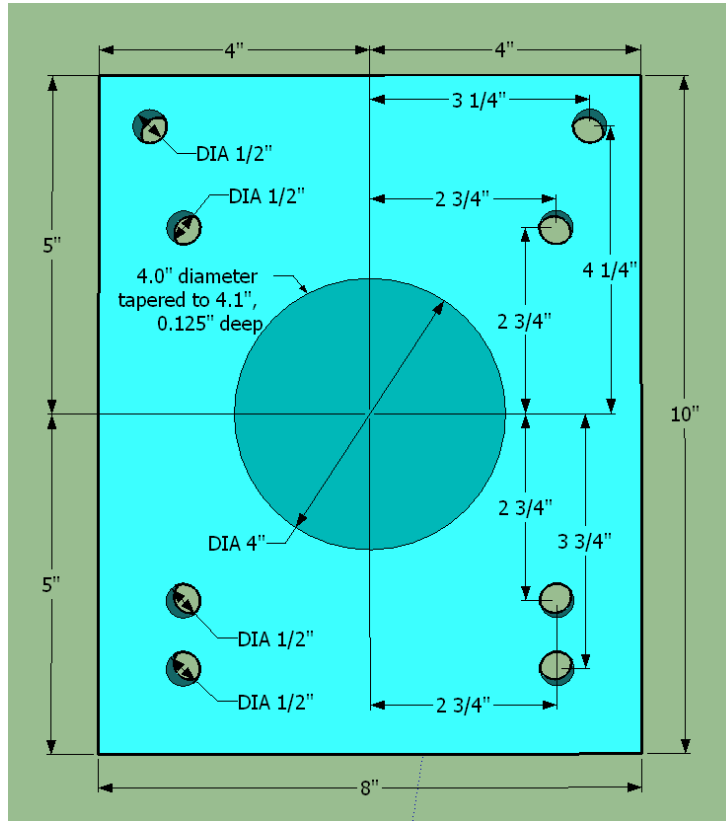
DST Sides-Plate of C4 specimens - Aluminum 1/2" thick.
